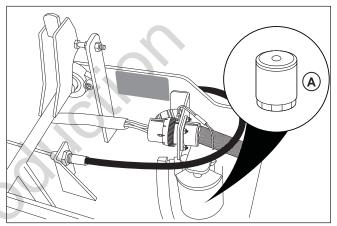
Changing the Hydraulic Oil Filter A. Hydraulic Oil Filter
